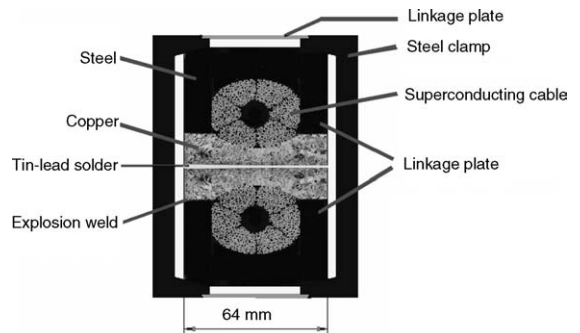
Cross-section of a conductor termination. The terminations of two adjacent pancakes were soft soldered (inner pancake and winding end joints) or electron beam welded (outer pancake joints) and finally clamped together.
